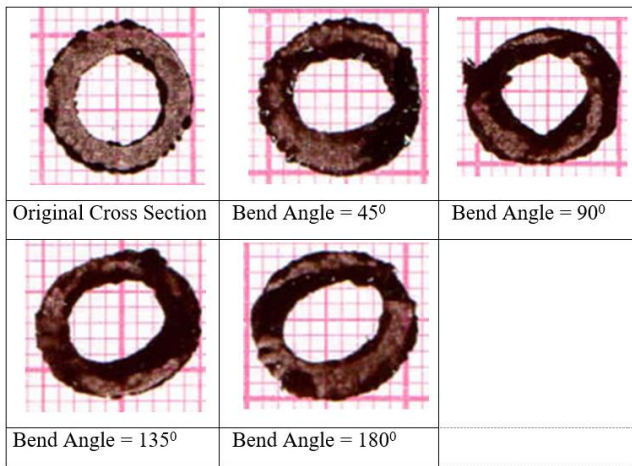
Deformed Section of Tube Bended on 30 mm Bending Radius
